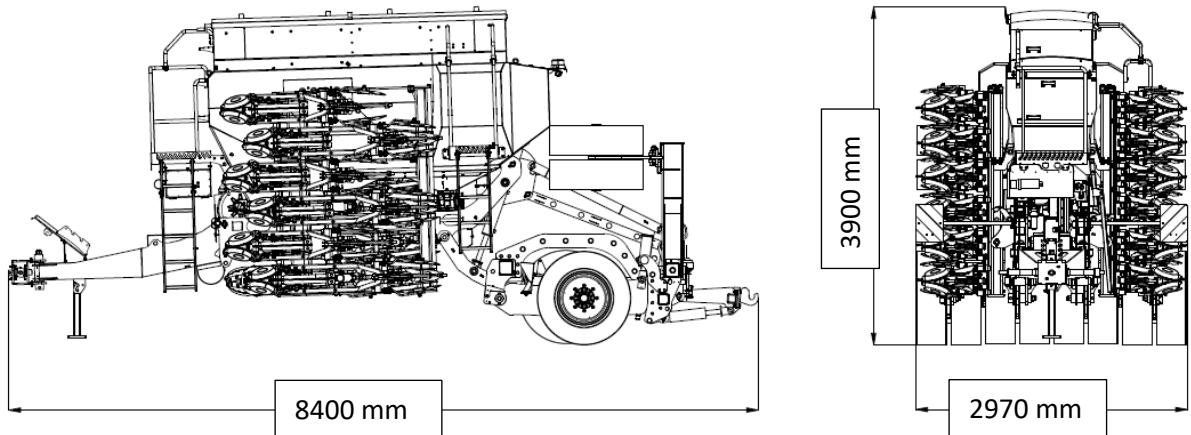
Overall dimensions of the 4,5 m machine with attachment.
